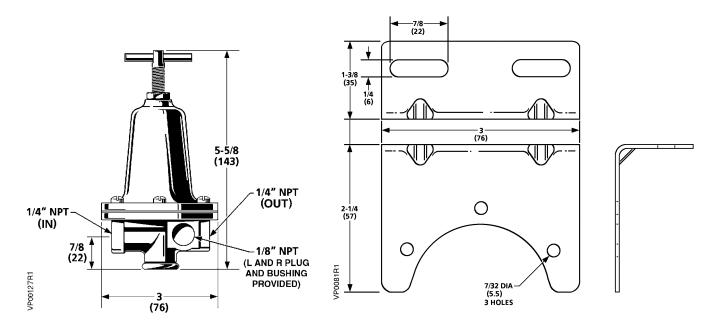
Dimensions of the Pressure Reducing Valve and Mounting Bracket.
